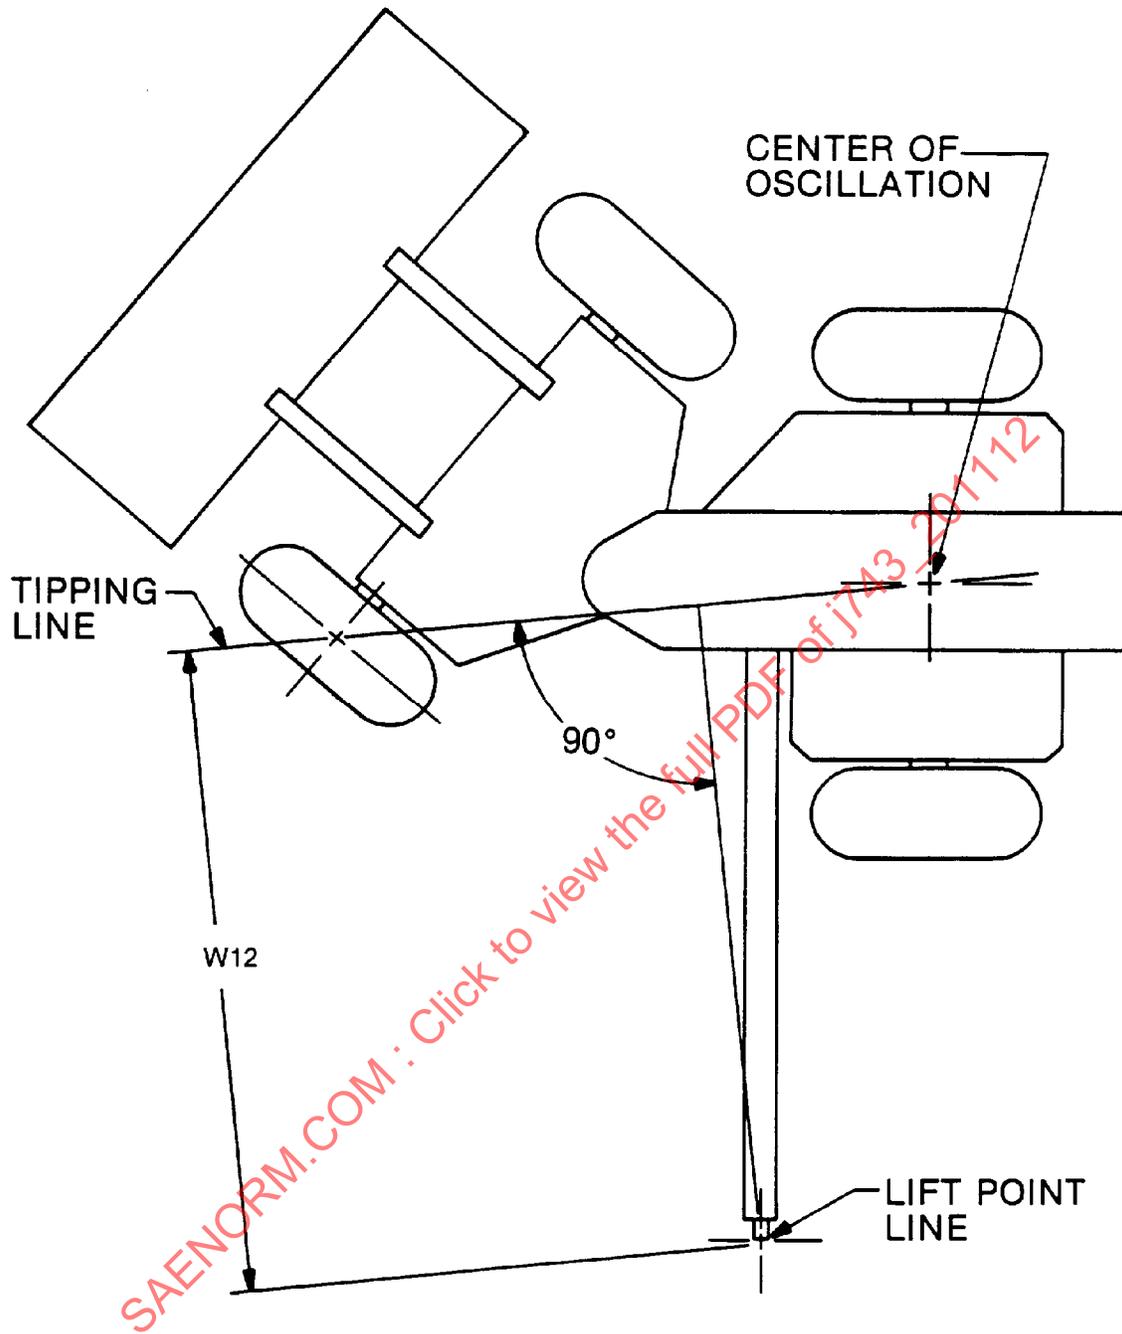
ARTICULATED WHEEL MACHINE STEERED RIGHT OSCILLATING
